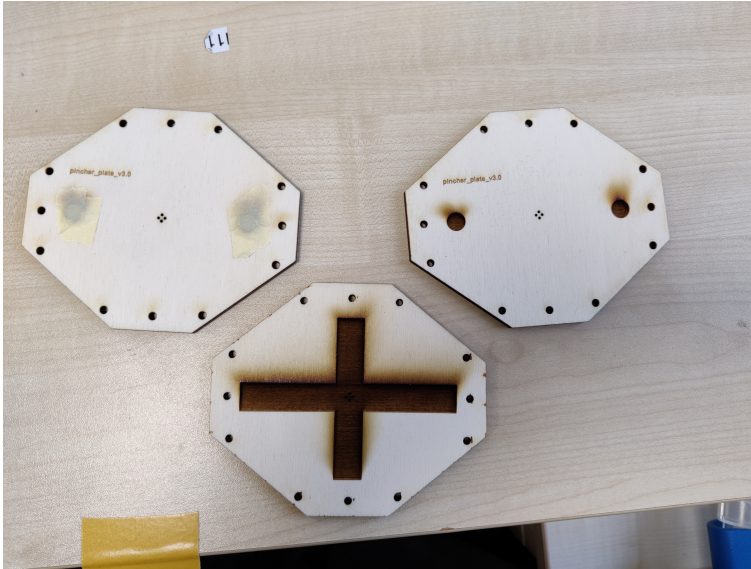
Lasercut of the *x4_pincher_plate.svg* file, showing both front and back sides being cut.
